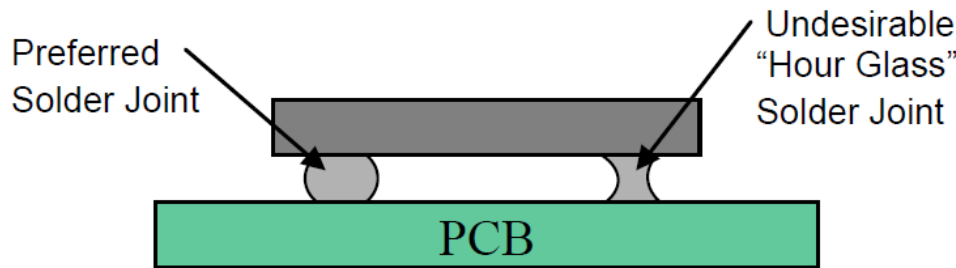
Side View of DFN 8 Attachment Illustrating Preferred and Undesirable Solder Joint Shapes
